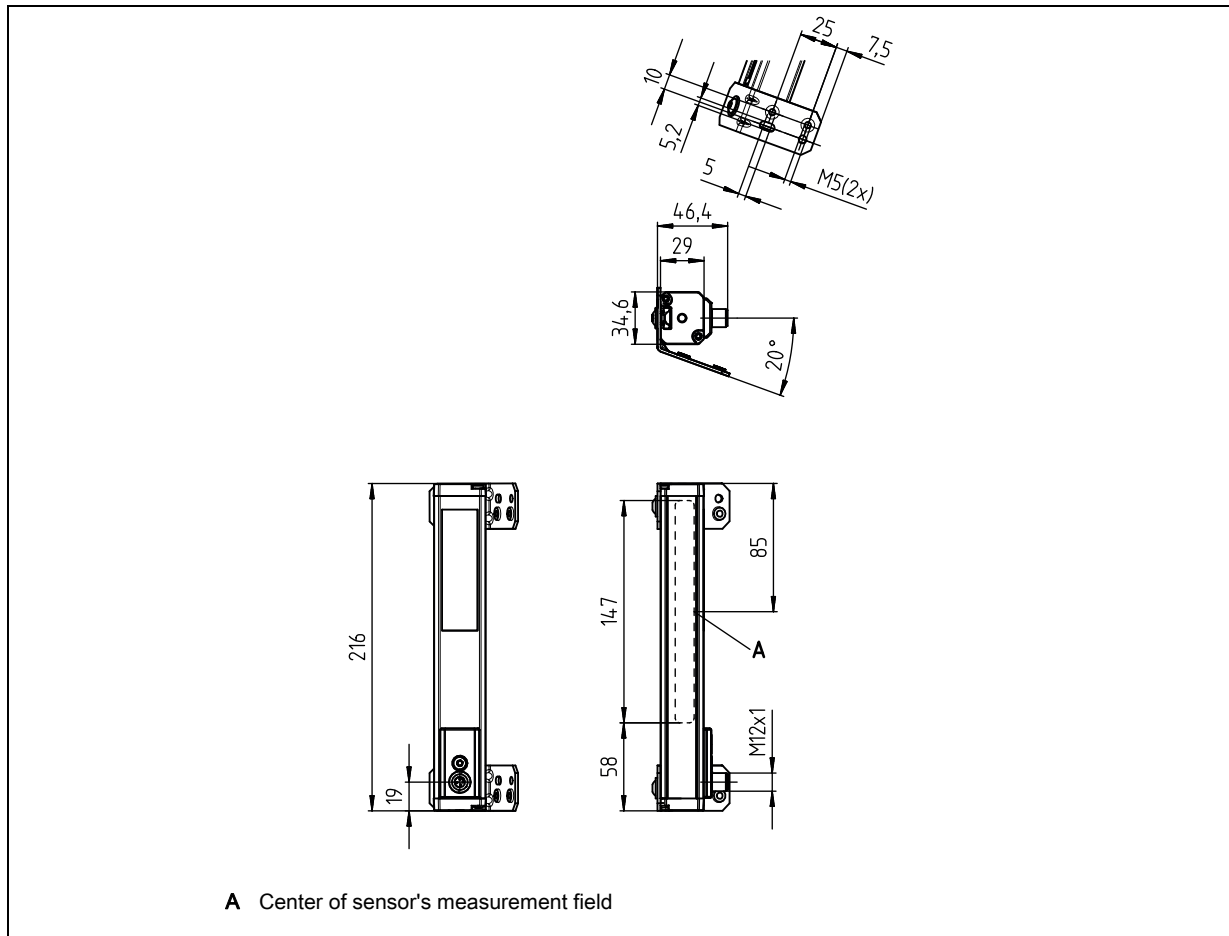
Dimensioned drawing OGS 600-140/D...-M12.8 – short version
